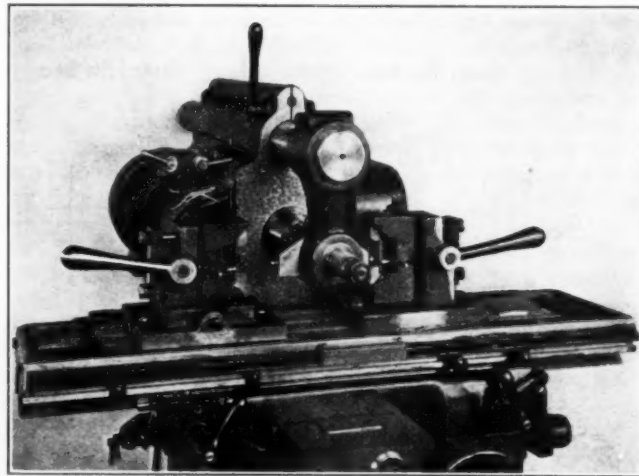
NO. 21 AUTOMATIC MILLING MACHINE
